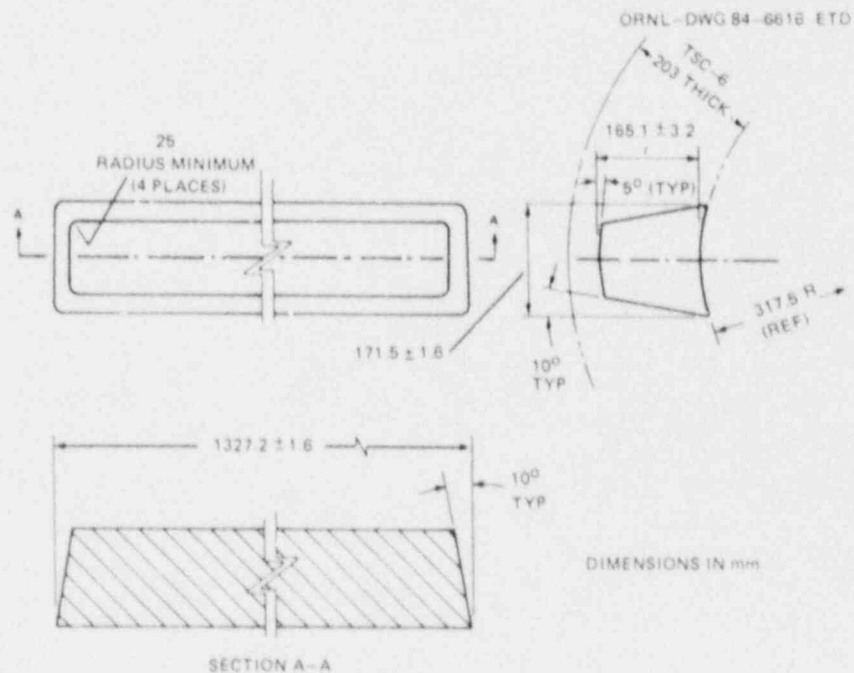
Nominal dimensions of plug inserts made from TSC-6 for vessel V-8.
